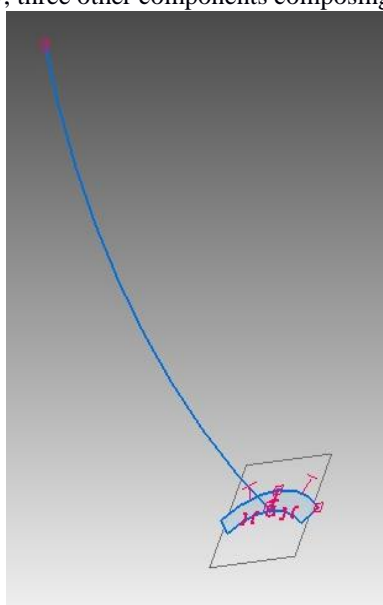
Drawing together with drawings of the tiller's sprocket cross-section – 28x11 [Own elaboration]
